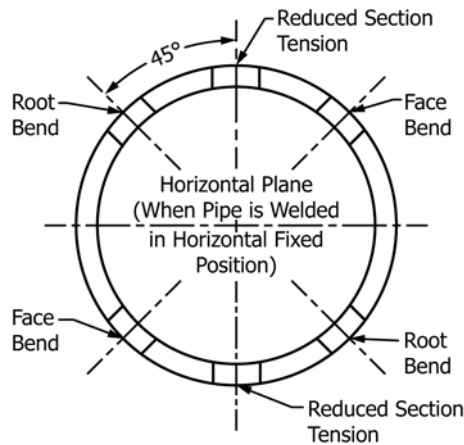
Order of Removal of Test Specimens from Welded Pipe or Cylindrical Castings $\frac{1}{16}$ to $\frac{3}{4}$ in. [1.6 to 19.0 mm] Thick
